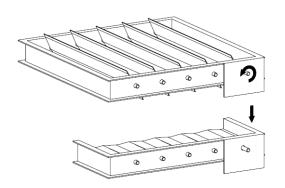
A: Turn the damper shaft until the blades are fully closed. SMRT is designed for Indoor applications. If required to mount outside, use proper (approved) protective enclosure.
